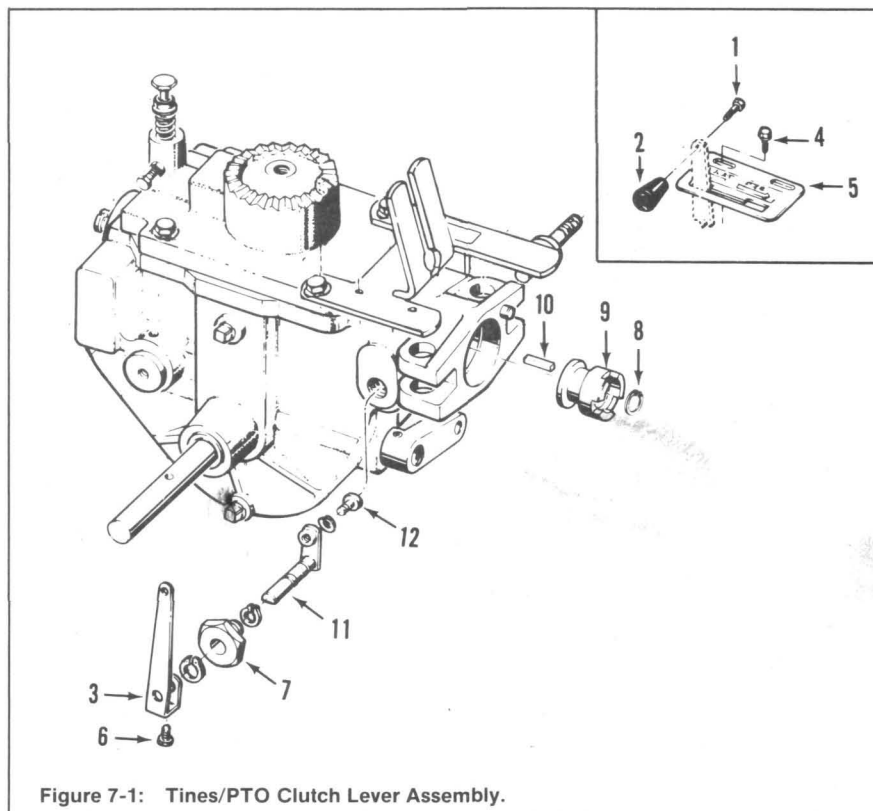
Tines/PTO Clutch Lever Assembly.
